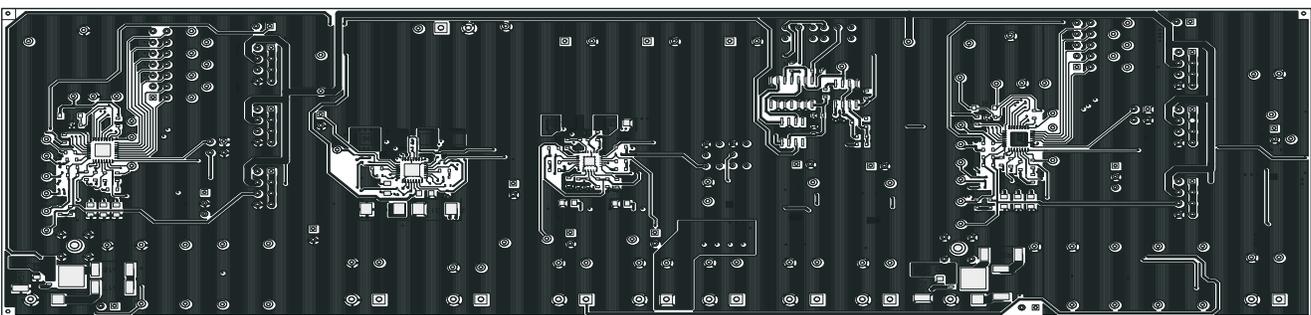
TPS59610EVM-634 Bottom Layer, Bottom View
